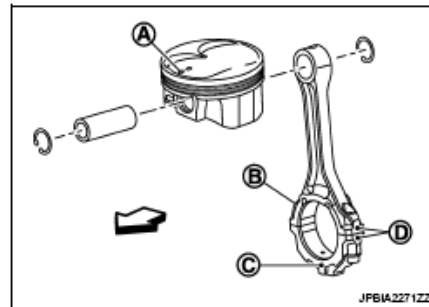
Identifying Front Mark On Piston Head And Cylinder Number
